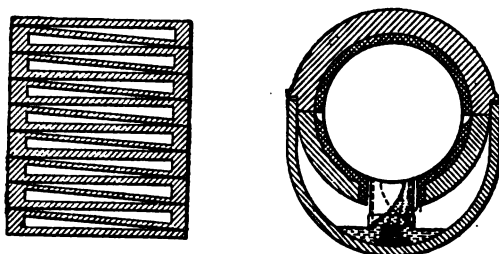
SEC. 7e.—Principle of operation of capillary bearing. (Courtesy Machinery.)
